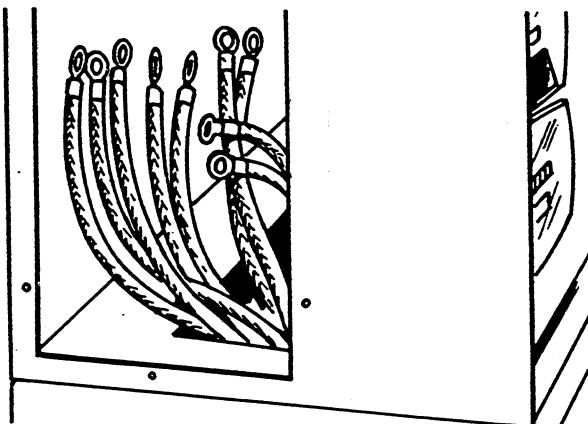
CONTROL BOX (SIDE PANEL REMOVED)
